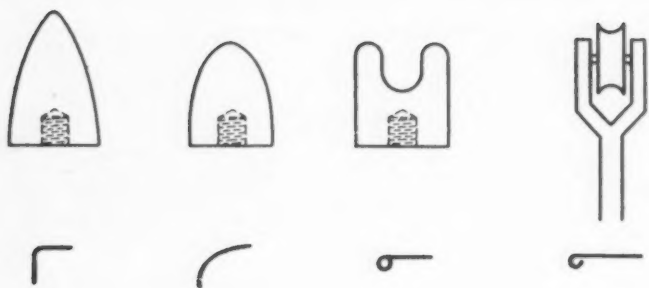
Spinning tools, and the shapes they form. The two at the right are for beading; the plain one for steel, the wheel for brass, copper and aluminum.
